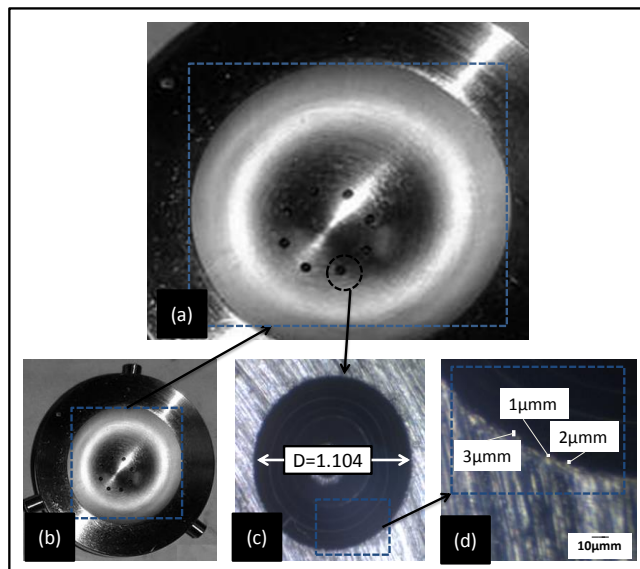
(a) Pits on the acetabular cup machined at current 0.5 A with 0.5 mm copper tungsten electrode (b) 8 pits after machine (c) Size of micro pit after machine (d) pit shape with no severe crack
